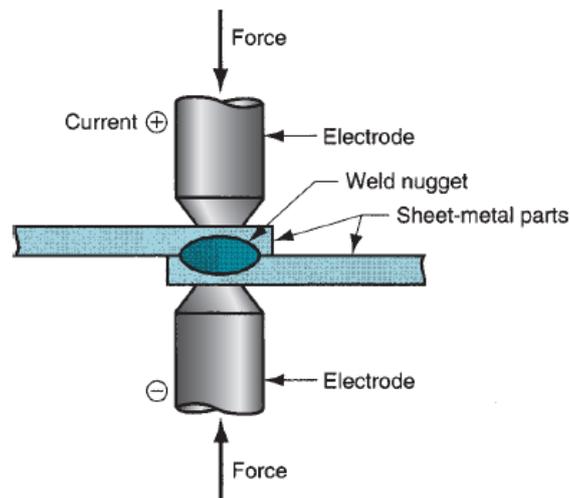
Typical arrangement for resistance spot welding [4]
